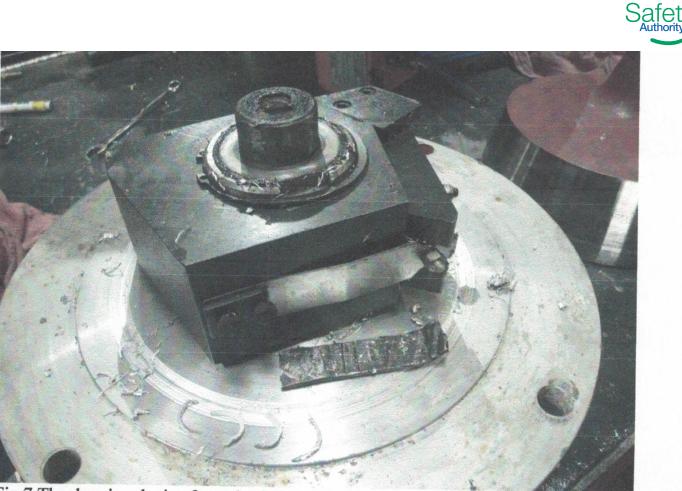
The dogging device from the failed unit. Note thin stainless steel adjustable trigger plate and badly damaged backing bar that failed.
